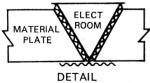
Welding butt joint longitudinals using c.b.s. (contact bar submerged arc welding).
